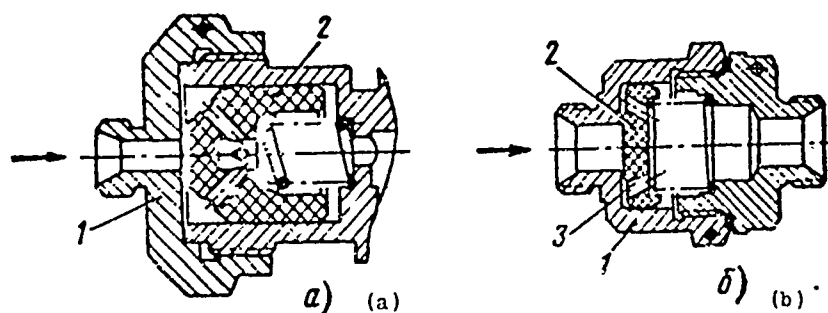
Modified version of a relief valve: a - chamfering; b - face of valve is machined; 1 - body; 2 - valve; 3 - bore.
